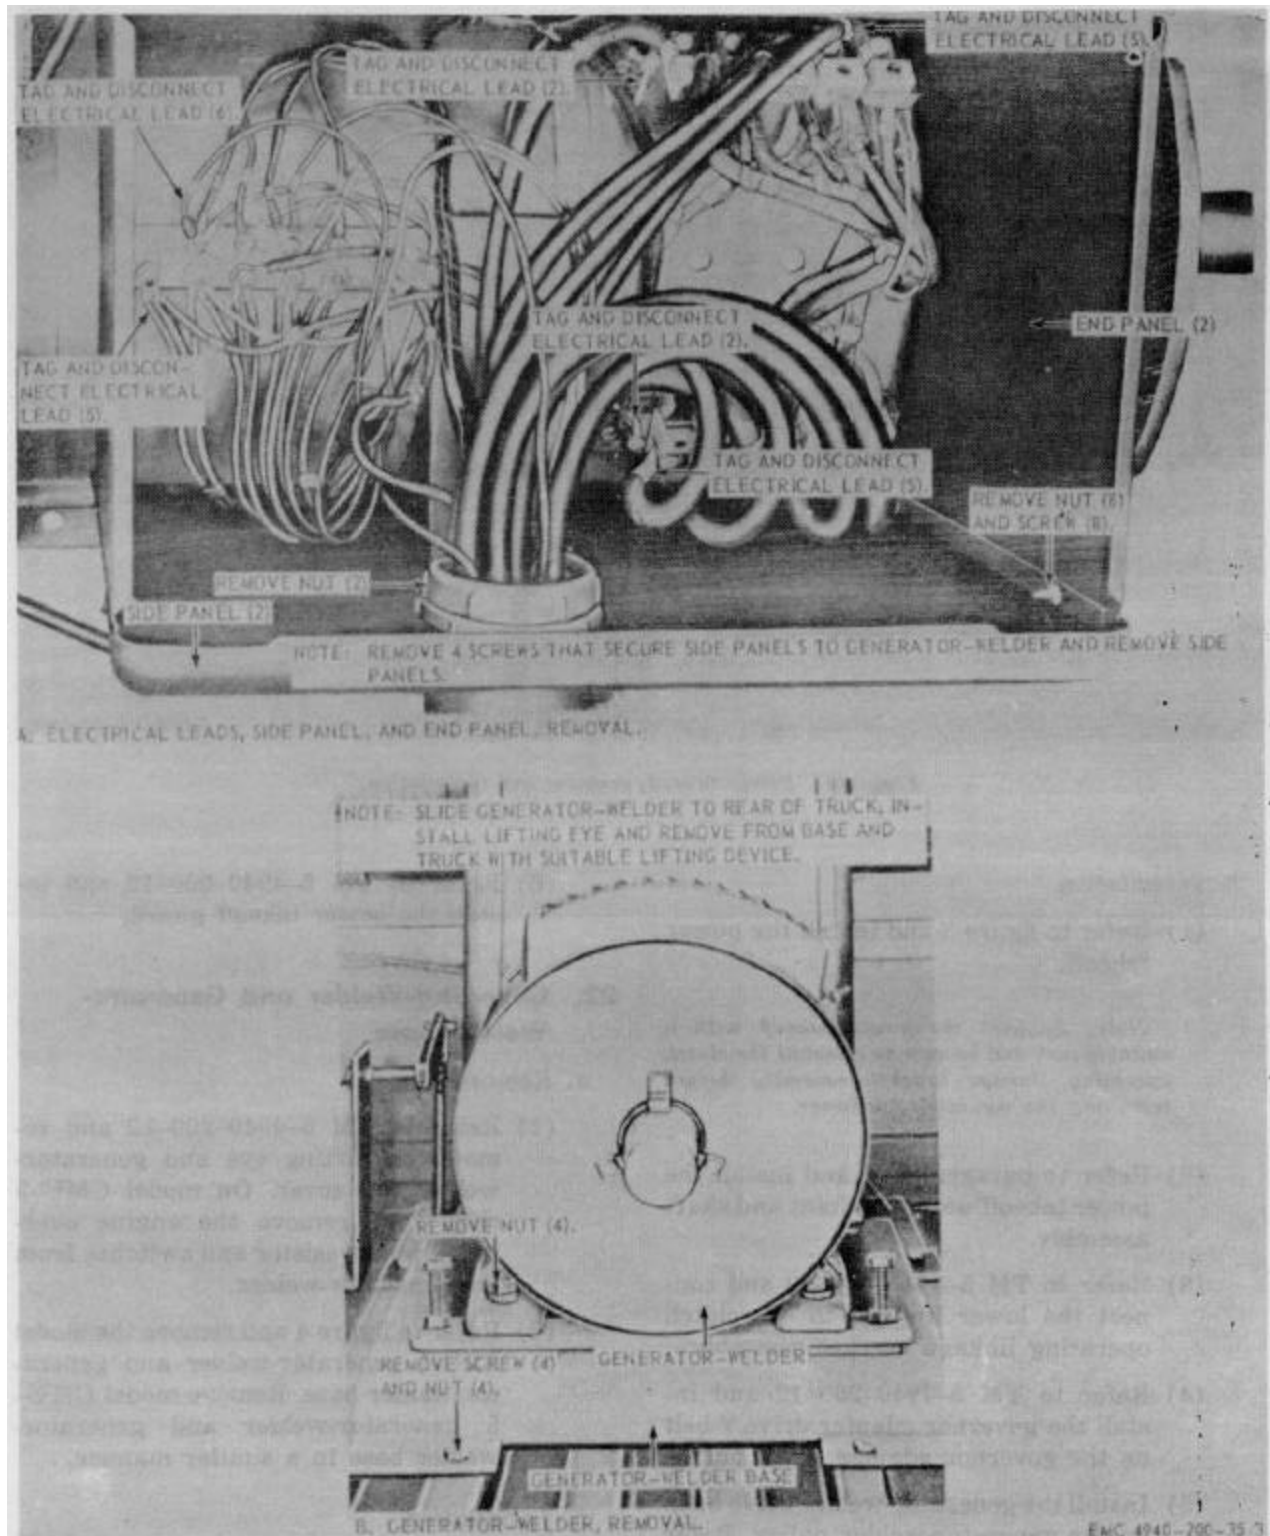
Generator-welder and generator-welder base, model SECM, removal and installation.
